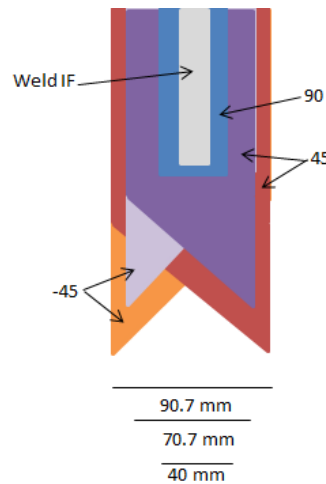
Sketch of weld interface layup for the MR9 skin.
